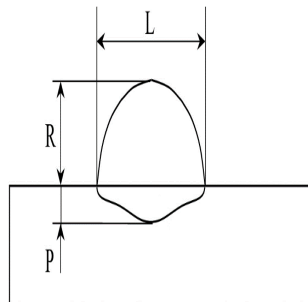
Geometrical parameters measured in the weld bead.
